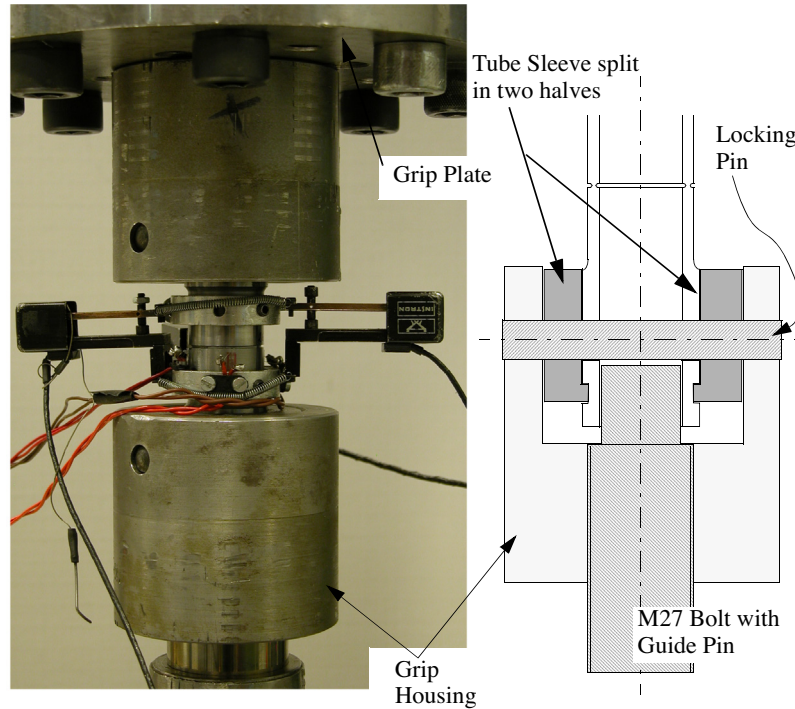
Fixture used in mounting the DNT specimens into the tension–torsion testing machine.
